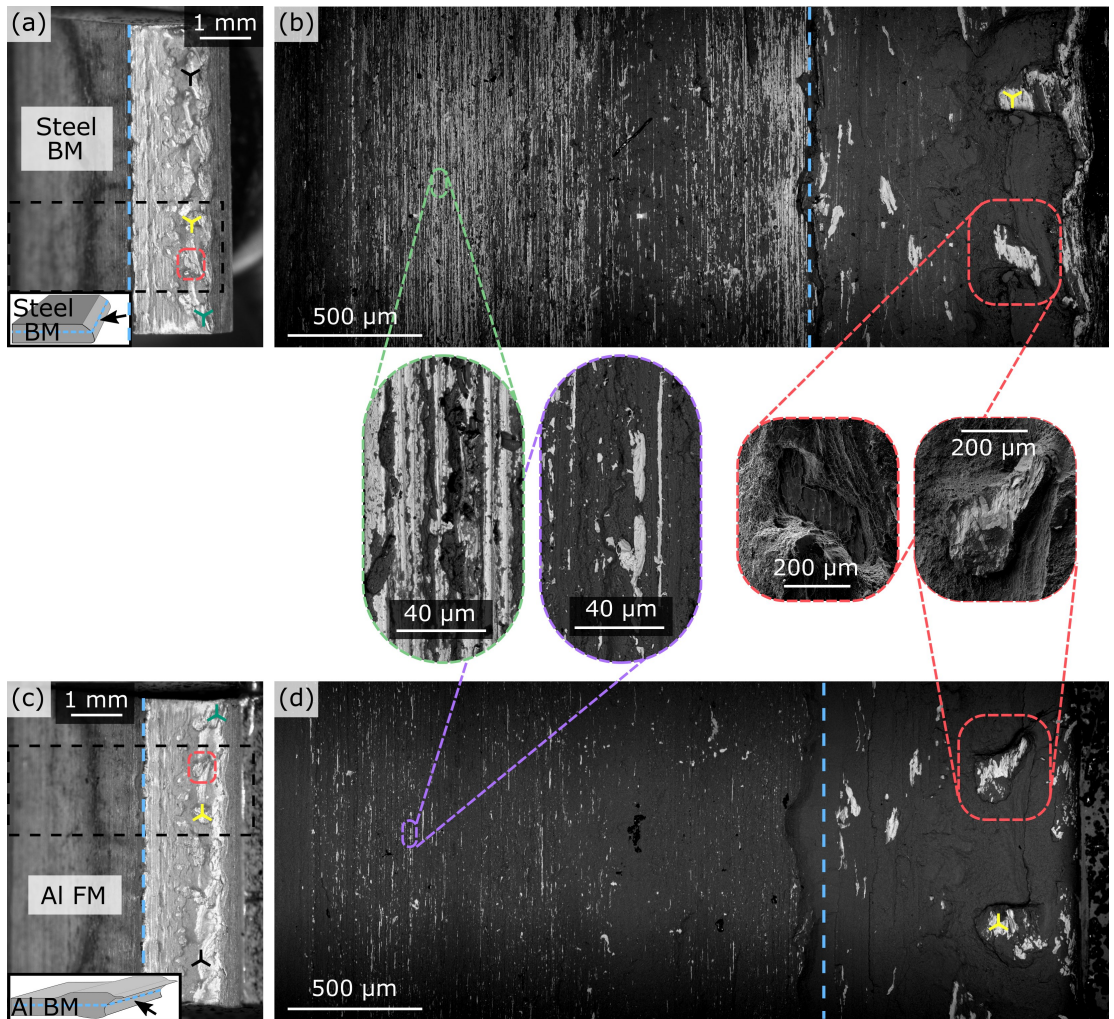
The Al and steel fracture surfaces resulting from tensile testing of specimen R2. Optical microscopy images of (a) the steel and (c) the Al fracture surface. The bottom insets illustrate the viewing directions. The dashed blue lines indicate the boarder between the top and bottom part of the fracture surfaces. (b) BSE SEM image of the steel fracture surface. The inset outlined in green displays a higher magnification image of the residual Al found on the upper part of the steel. (d) BSE SEM image of the Al fracture surface, where the inset outlined in blue shows residual steel fragments. In both (b) and (d), the insets outlined in red show SE SEM images of a dimple in the residual Al on the steel fracture surface and correspondingly a bulge covered by steel sticking out on the Al fracture surface. In all images, the coloured icons indicate corresponding locations on the two fracture surfaces.
